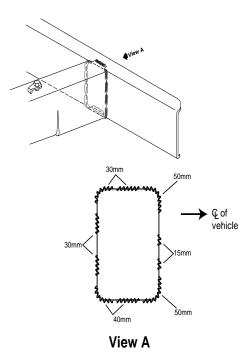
Weld Perimeter of Joint, as Indicated
